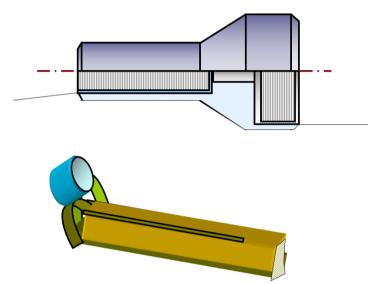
Schematic Diagram of Pipe Roof Jacking Connecting Sleeve and Trolley Arm Straightener
